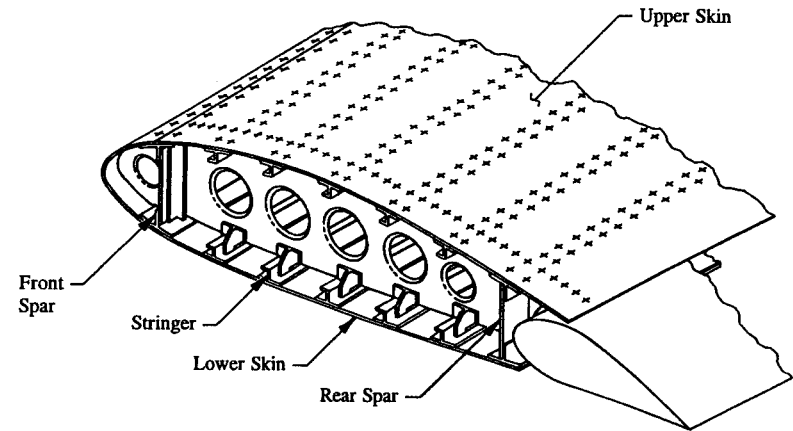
Structural arrangement of a multi-spar wing.
